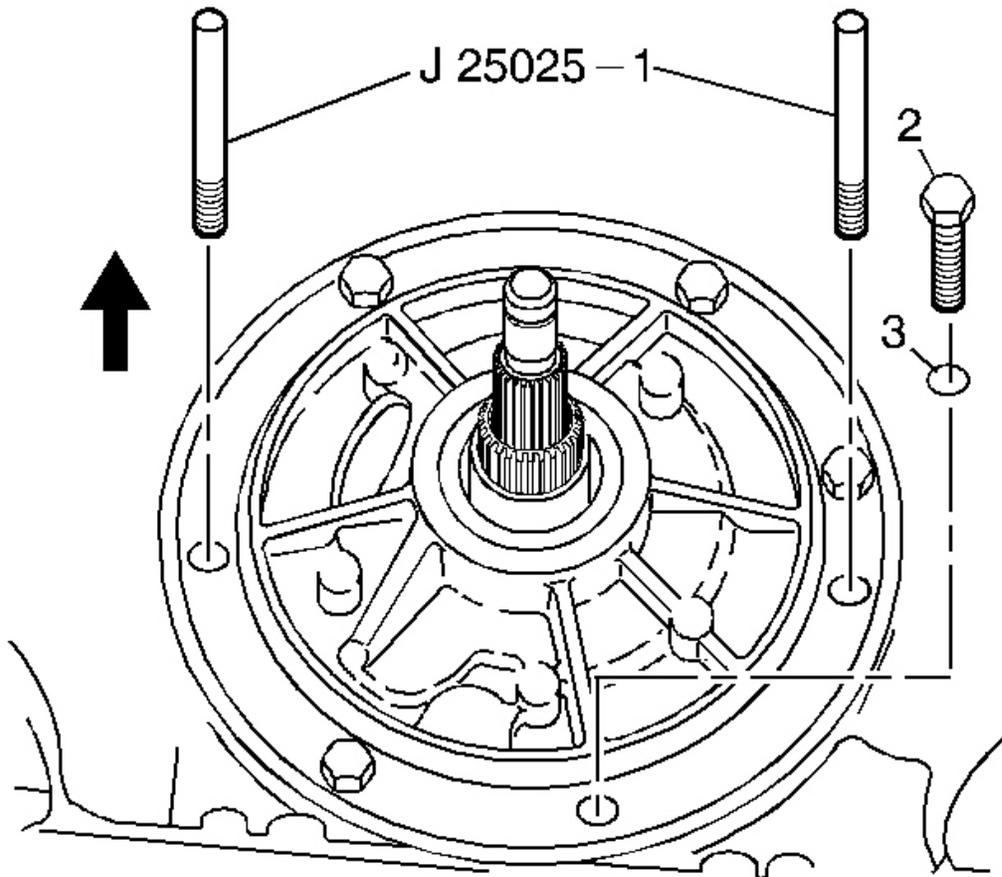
Installing Pump To Case Bolts & New O-Ring Seals
